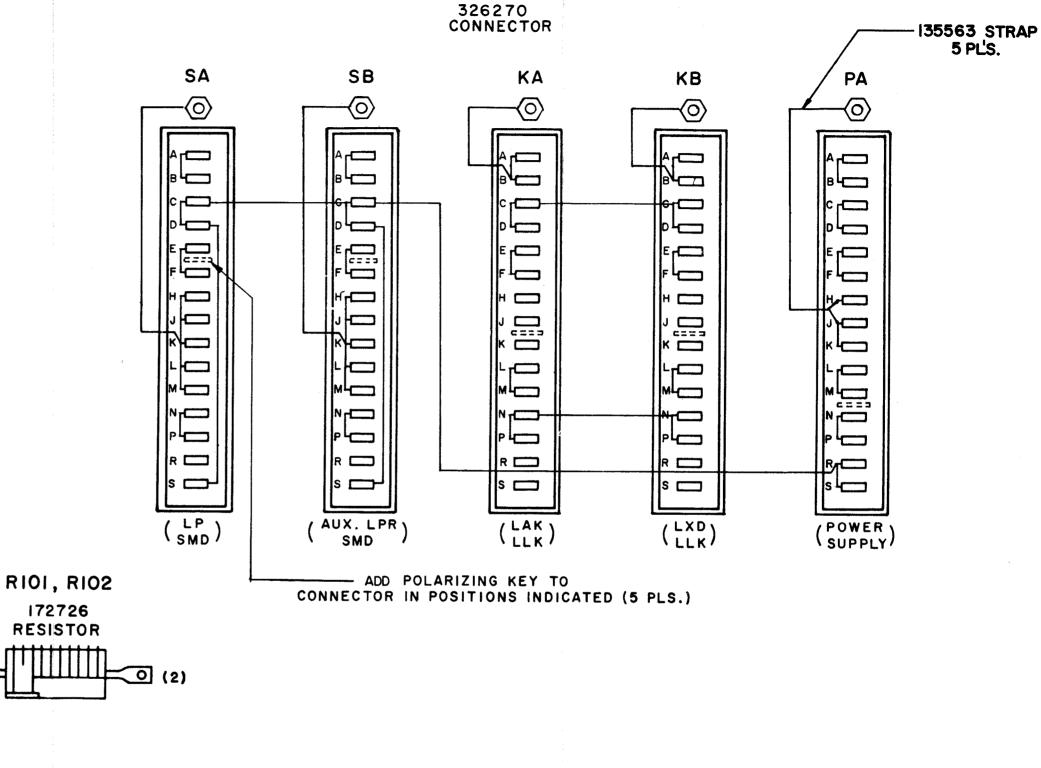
323811 Electrical Service Assembly (Signal) Wiring Diagram (Sheet 2 of 5)
